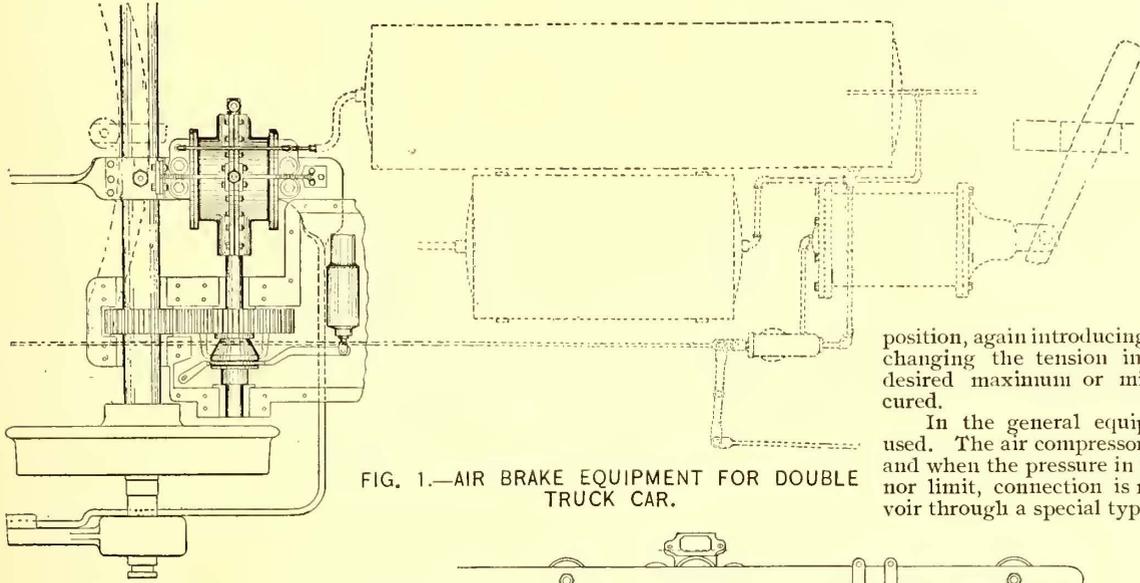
AIR BRAKE EQUIPMENT FOR DOUBLE TRUCK CAR.
